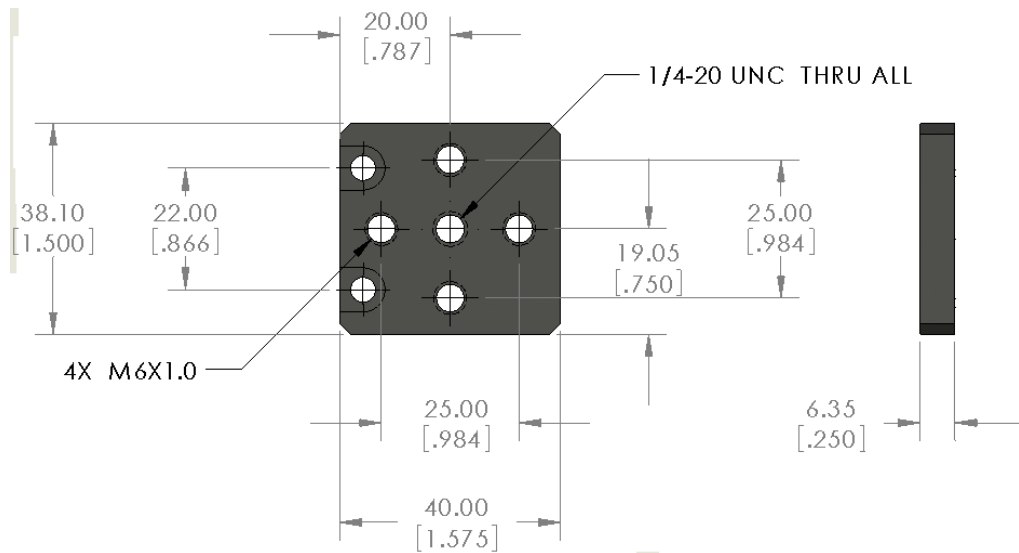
Backward Compatible Mounting Block Dimensions
